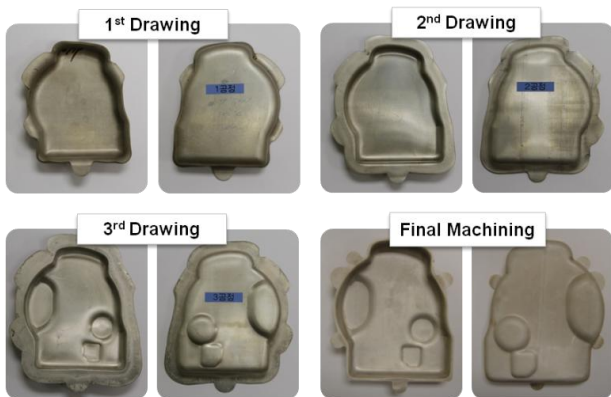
AZ31B EL-cover parts fabricated by warm deep drawing process
